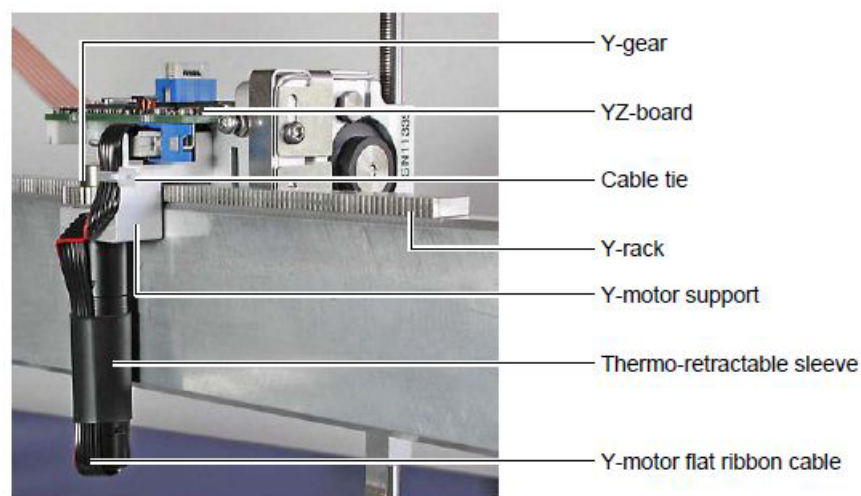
Y-Motor Assembly with Fixed Y-Motor Support
